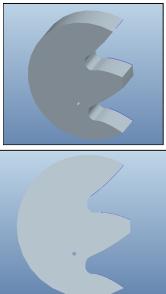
Isometric view and Front view of 3-D asymmetric gear with hole in 3rd trial
